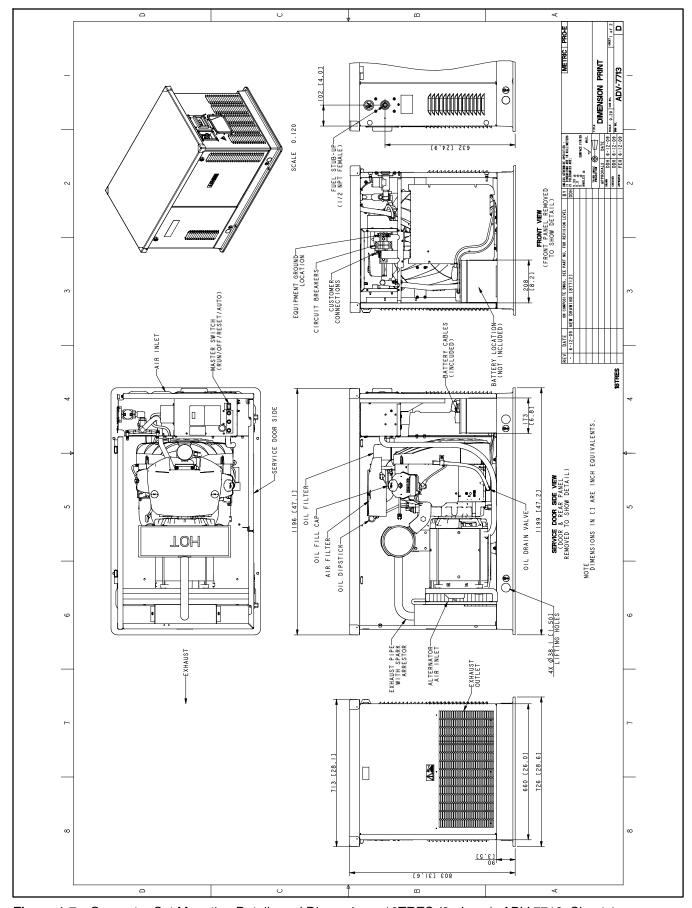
Generator Set Mounting Details and Dimensions, 18TRES (3-phase), ADV-7713, Sheet 1
